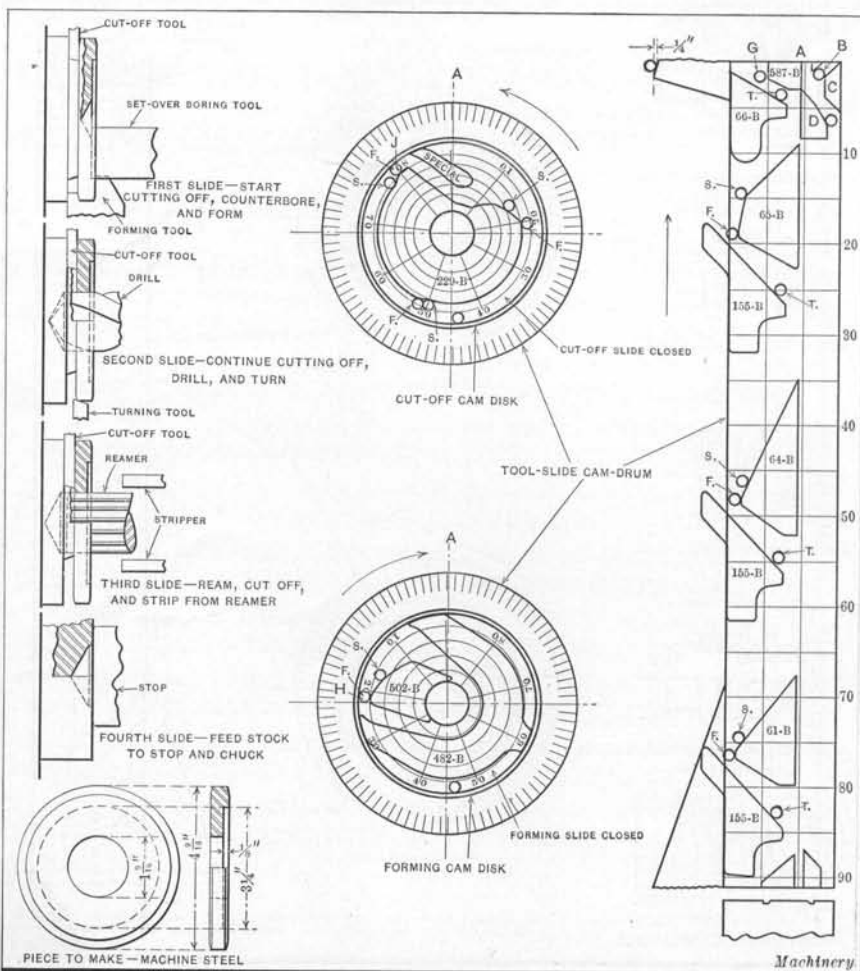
Tooling Lay-out for a Thin Washer in which Cut-off Tool works continuously
